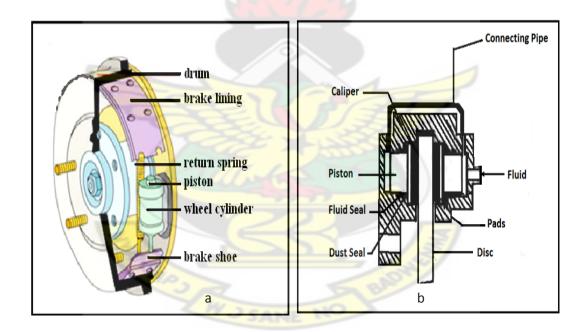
The Brake System (a) Drum and (b) Disc brake assembly
